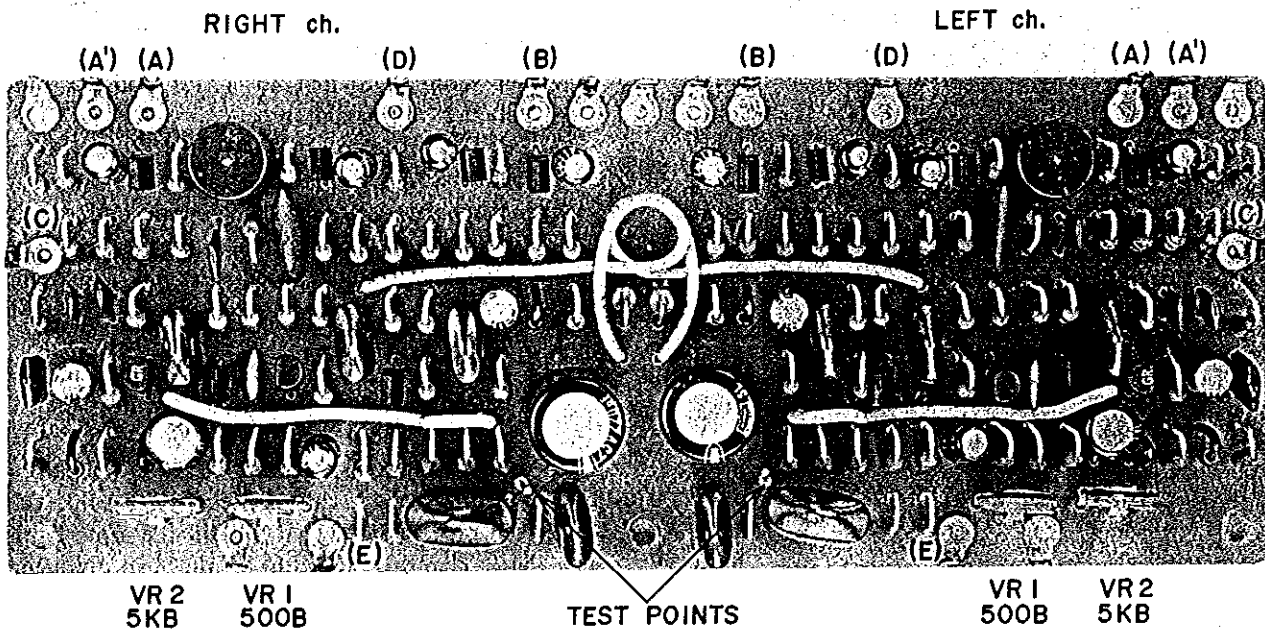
DOLBY N.R. P.C. BOARD TD-5301 (Front Side)
